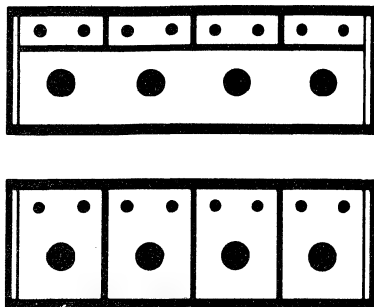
Board Layout of the Power Combiner Transmission Line Assembly
